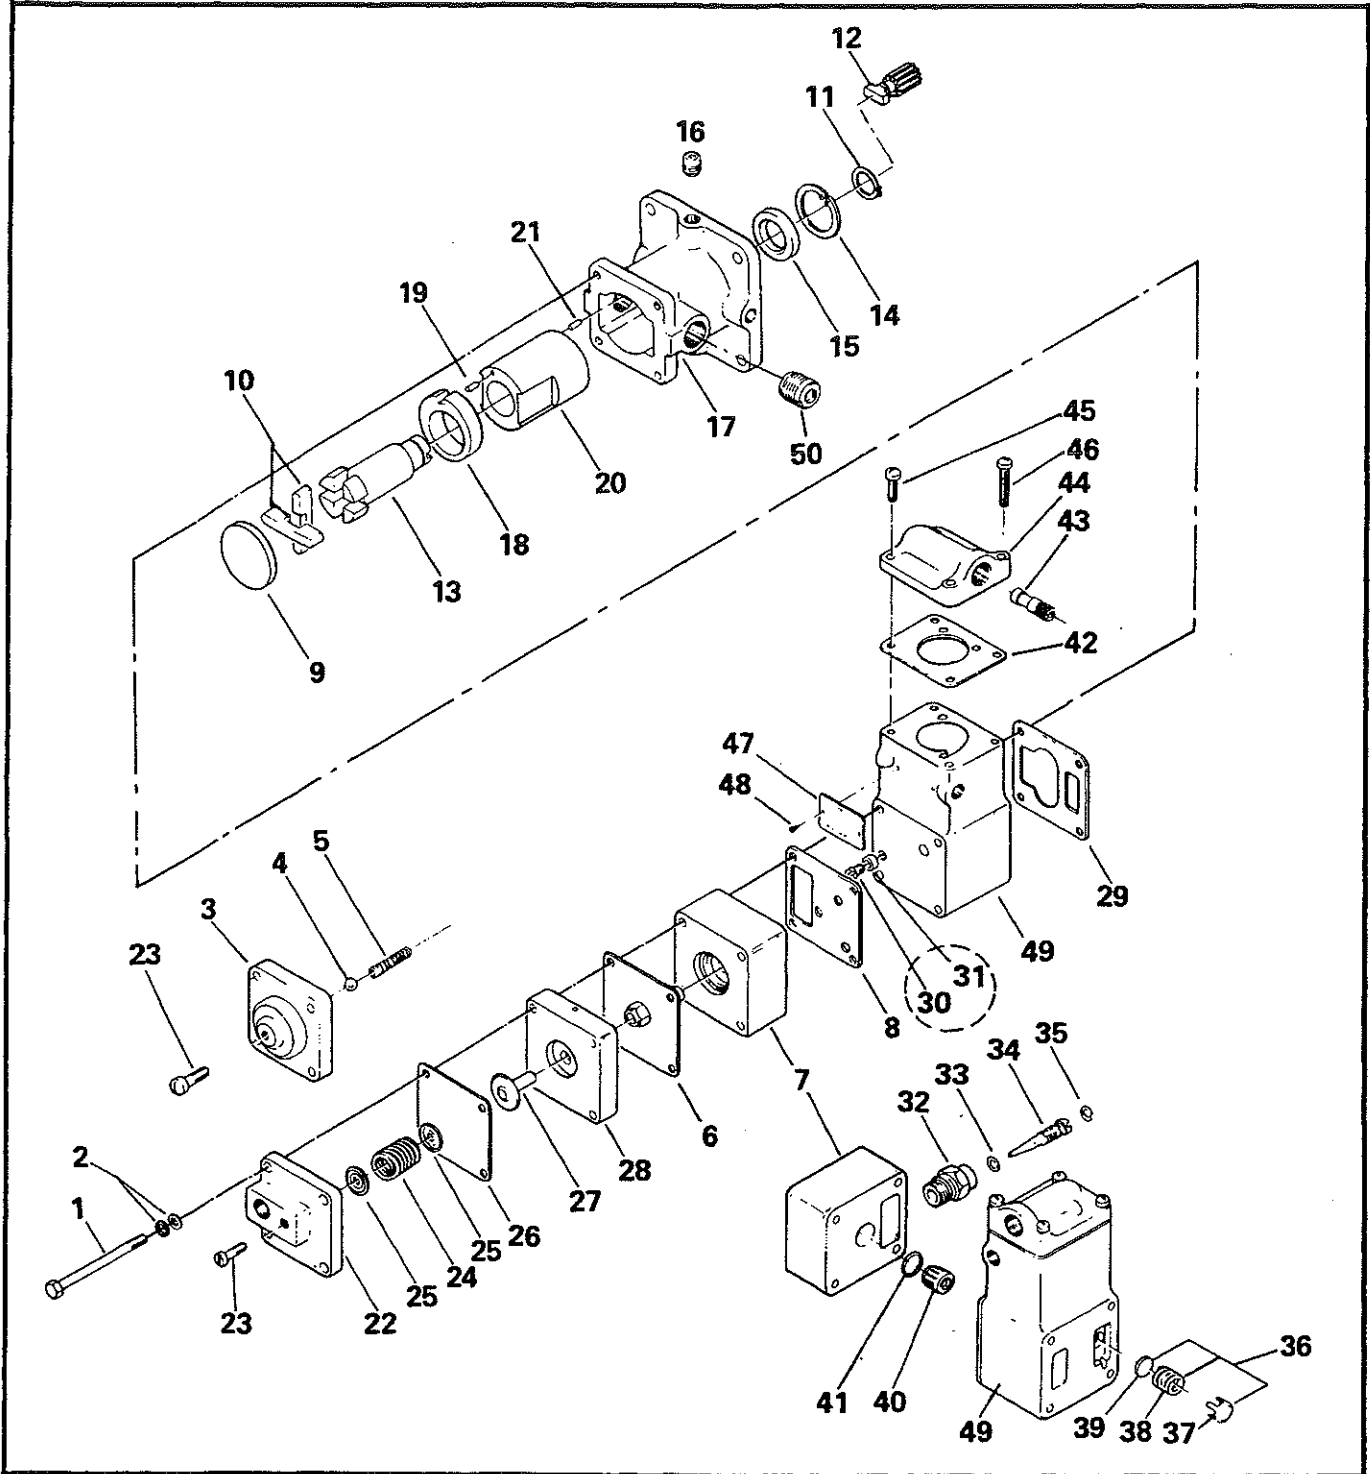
FUEL PUMP ASSEMBLY.
